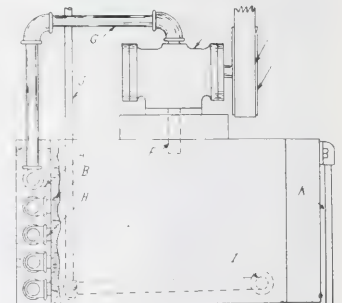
ARRANGEMENT OF CIRCULATING PUMP AND COILS IN QUENCHING TANK
